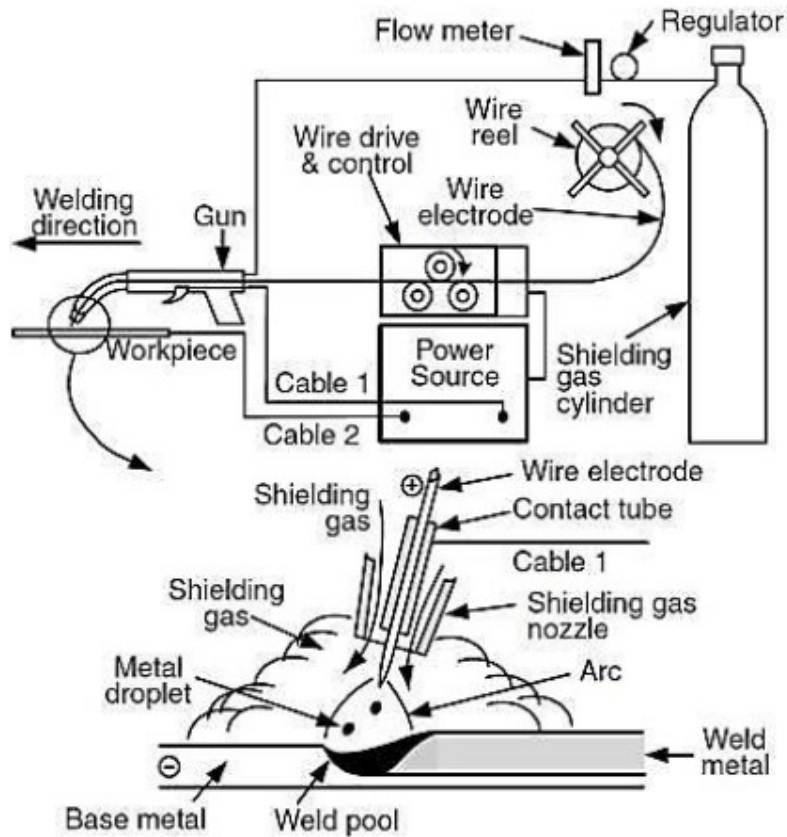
Gas Metal Arc Welding (GMAW) process [16]
